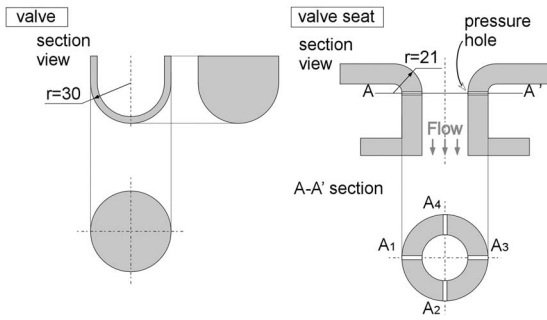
Details of a valve and a valve seat, and points of pressure measurement
